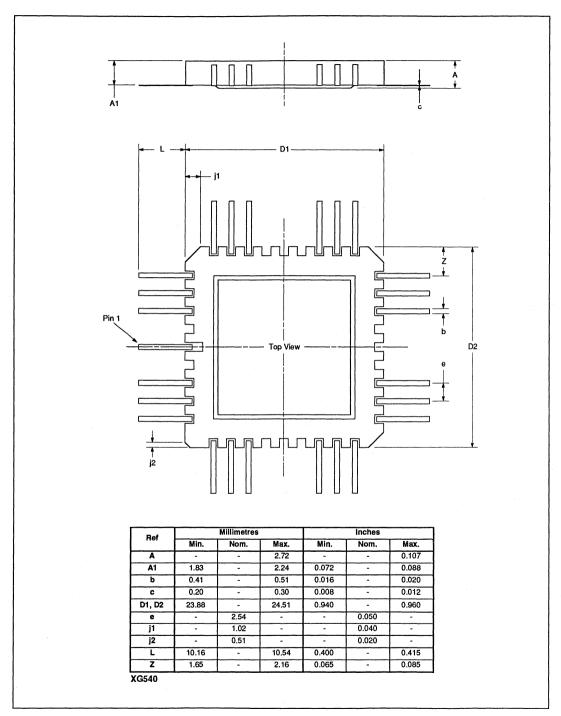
68-Lead Topbraze Flatpack - Package Style F
